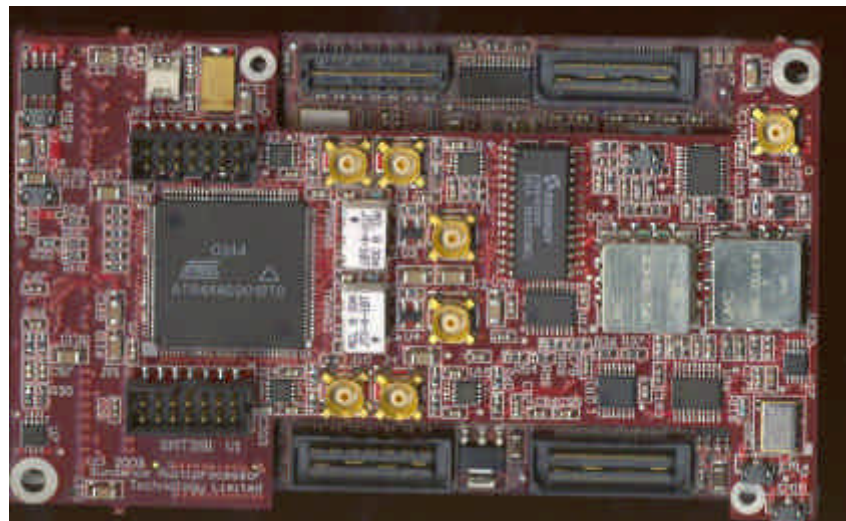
Top view of SMT391-VP (No Heat Sinks, Rev1 PCB).
